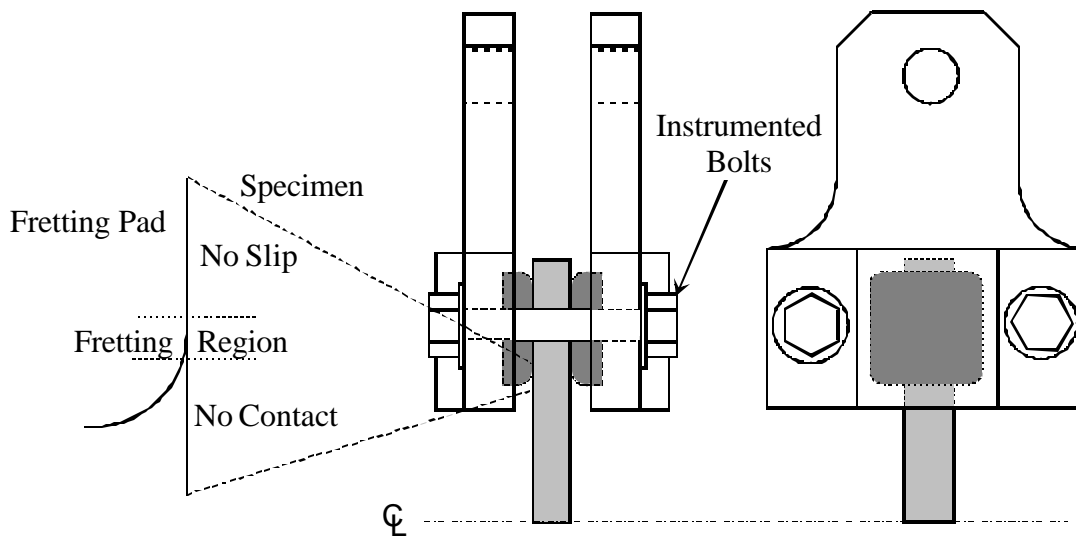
Schematic of the fretting fatigue gripping system and location of fretting damage.
